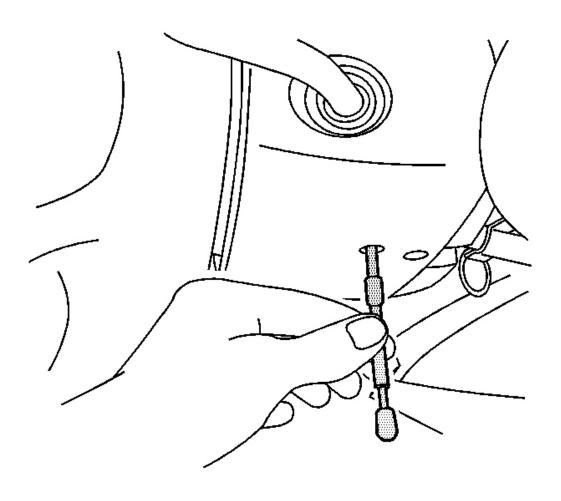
Identifying J 42640 Courtesy of GENERAL MOTORS CORP.
